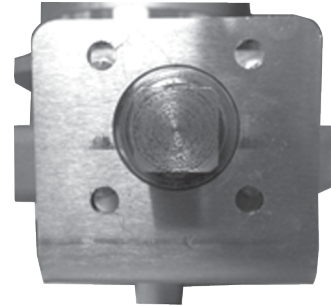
Coupler Installation for Size 4-inch NPT Single Flange Rotary Actuator
